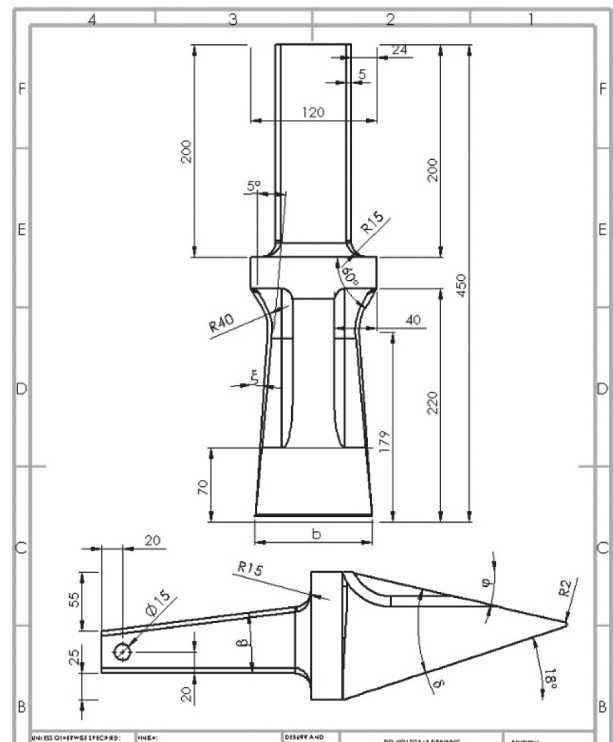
Geometric dimensions of chisel-shaped cutting tooth with support bracket used in open-pit coal mines in Oltenia Basin
